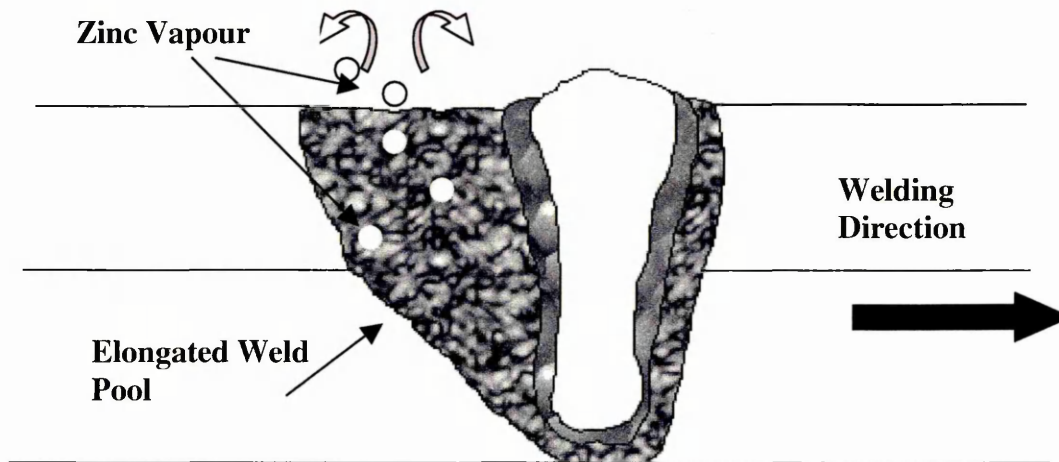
Additional venting permitted by elongating the weld pool with the use of a 'Twin spot' laser beam
